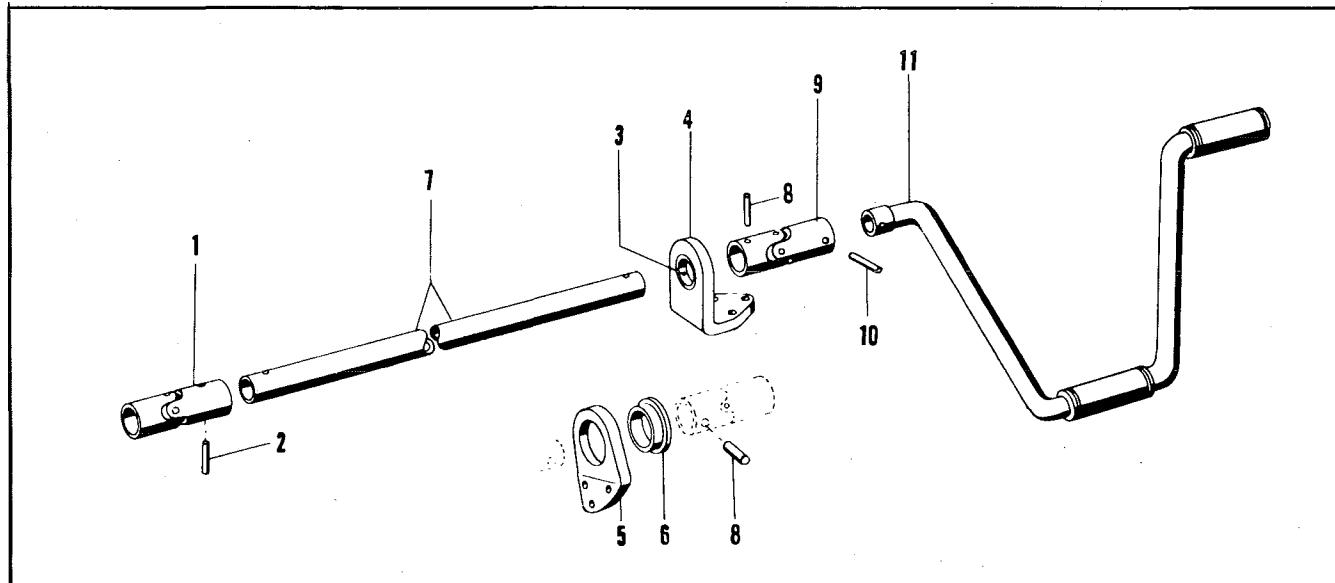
Winch Drive Assembly, Part Nos. 102286 and 104401
